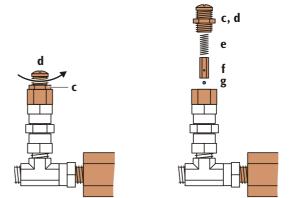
Dismantling the safety valve (c) counter nut, (d) valve cap, (e) compression spring, (f) hexagonal piston, (g) steel ball bearing
